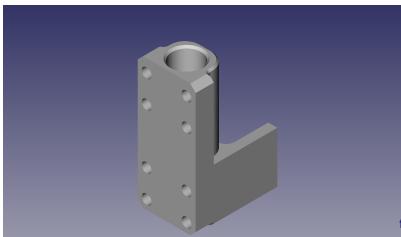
Begonia 3D Printed Extruder Mt Top Double Bearing Holder Render
